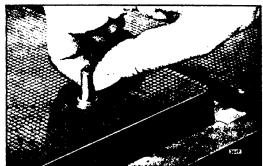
Lapping Spray Tip on Lapping Blocks J 22090
